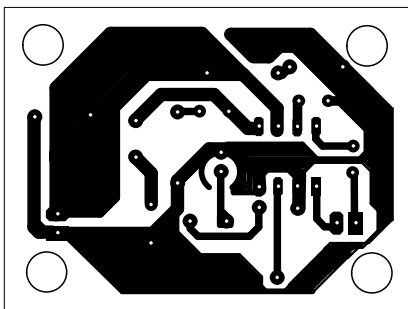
Solder-side PCB layout for the audio amplifier circuit
